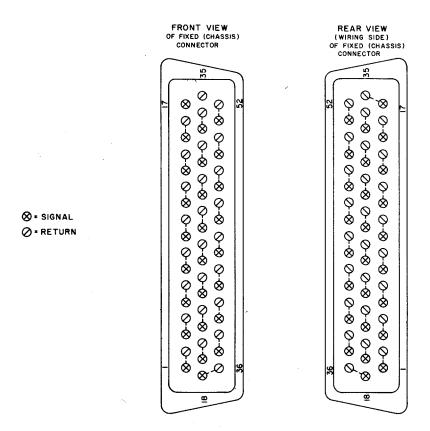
Contact Arrangement for Preferred 52 Pin Auxiliary Connector
